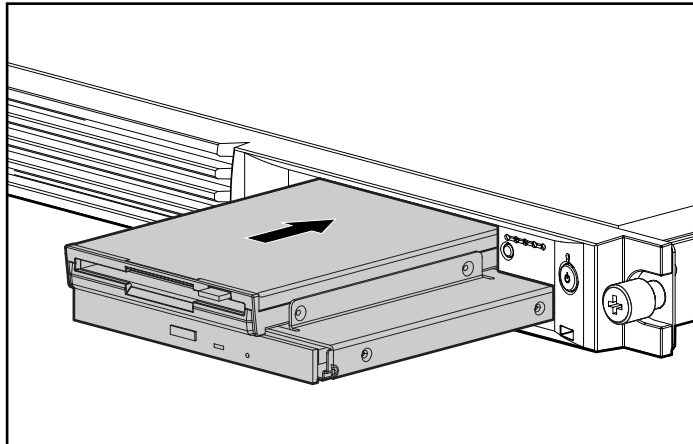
Installing a CD-ROM/diskette drive assembly
